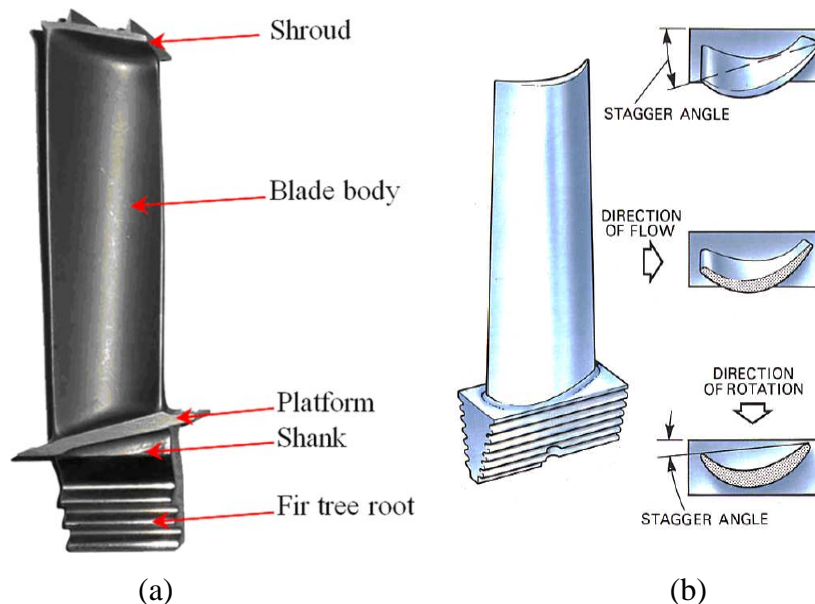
blade shape and section: (a) blade parts, (b) blade stagger angle [11, 12].
